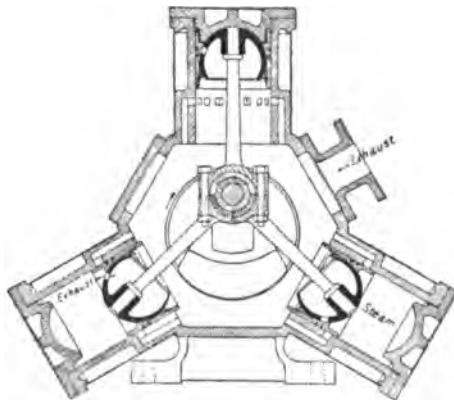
Brotherhood's Three-Cylinder Engine: transverse section.
